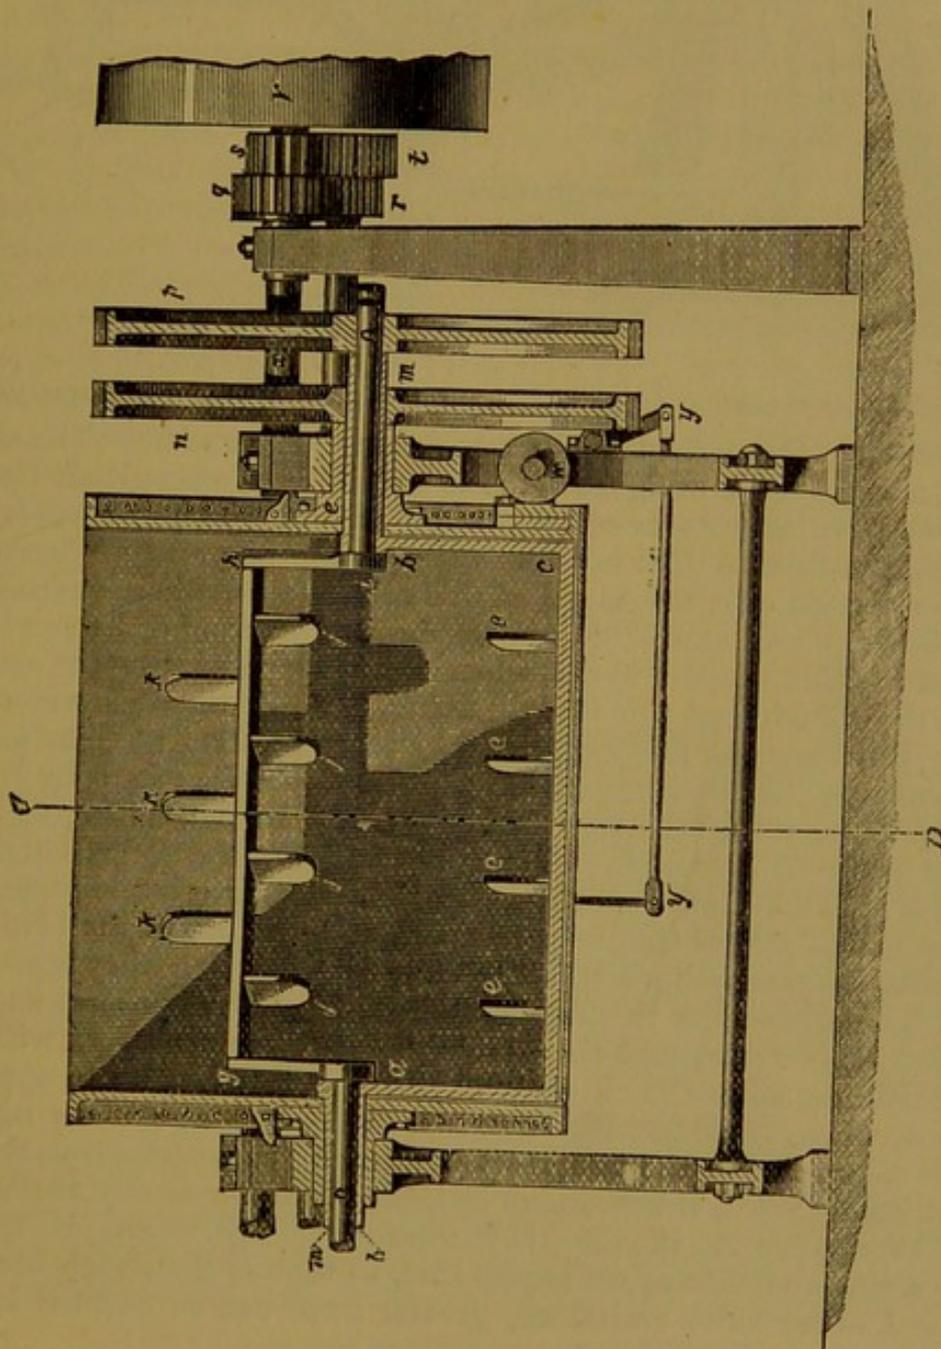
LONGITUDINAL SECTION THROUGH THOMSON KNEADING MACHINE.
